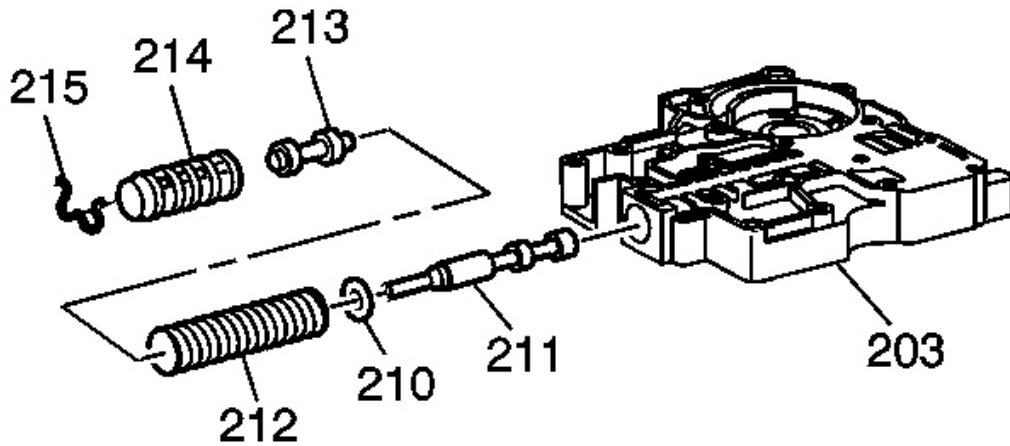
Identifying Pressure Regulator Boost Valve & Pressure Regulator Valve
